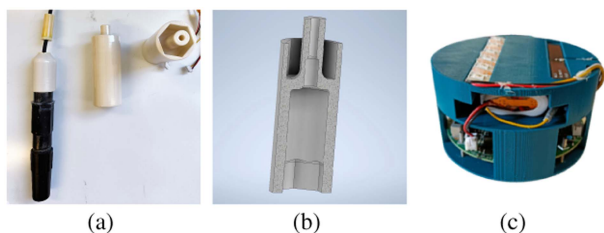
(a) Picture of an older version of the pH holder which broke on the field (left), and two of the newest pH holder designs (right). (b) 3D half section image of pH holder. (c) Picture of the PCB-holder containing the PCB, battery, led strip, and antenna.
